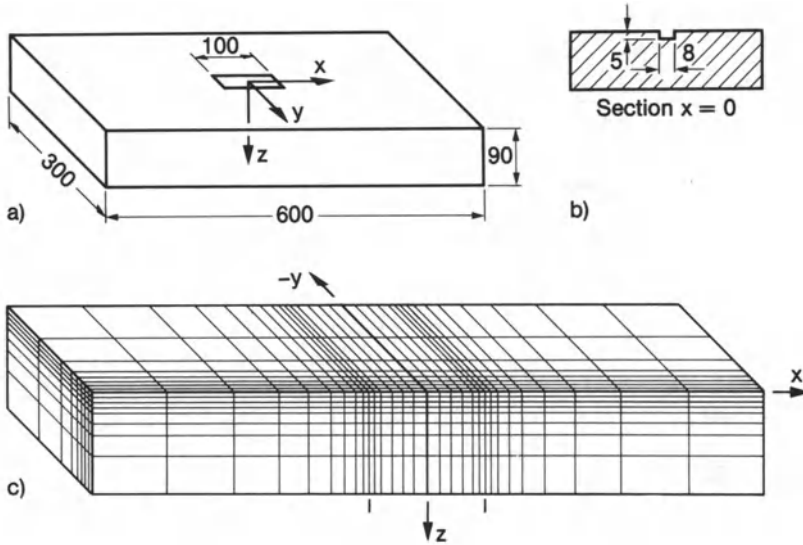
Solid element model (c) of rectangular mild steel plate (a) with surfacing bead groove (b); after Ueda et al. [255]
